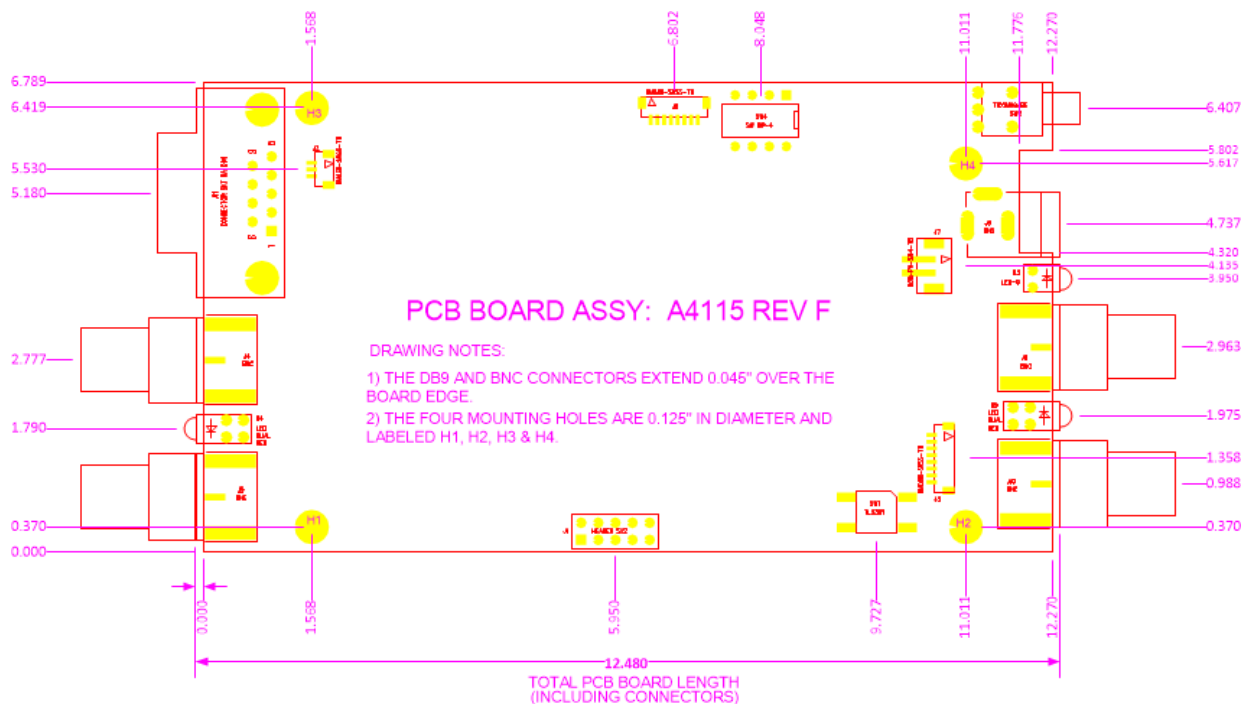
DX-2200 Board (PN: P4115-SW-02) Mechanical Drawing
